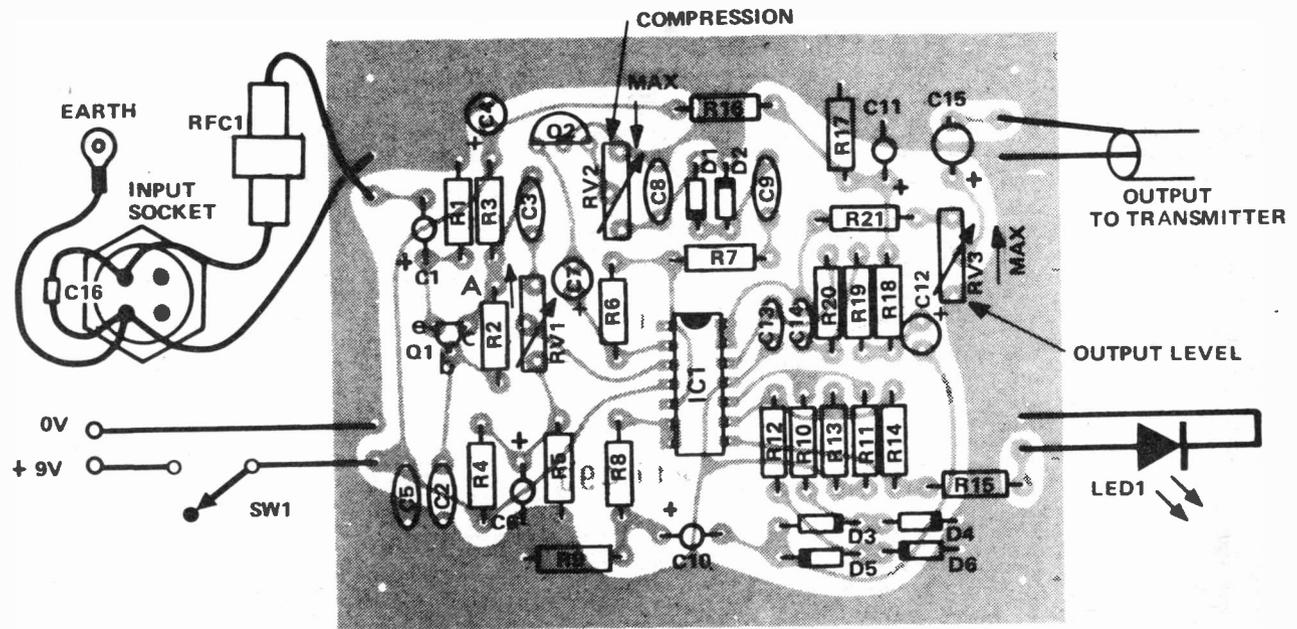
Component overlay of the speech processor. Note the RF choke and capacitor mounted between the PCB and input socket.
